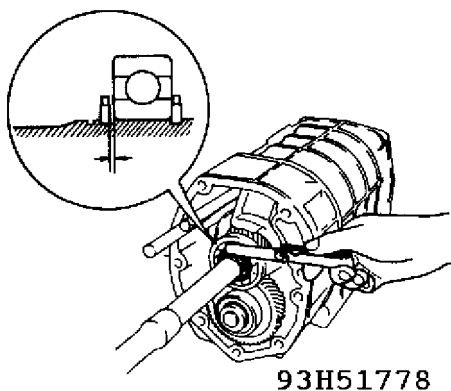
Measuring Clearance Between "C" Washer and Rear Bearing (R-Type)
